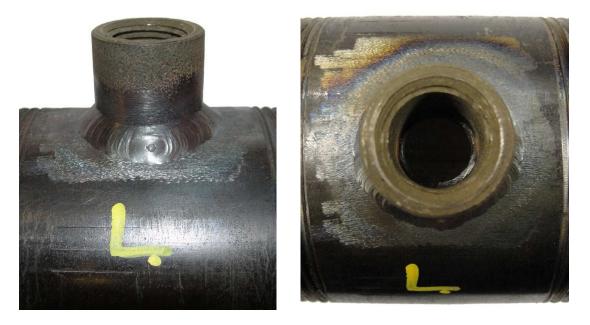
3/4" NPT Half Coupling Welded to Pipe with 13/16" Hole Drilled Through Center
